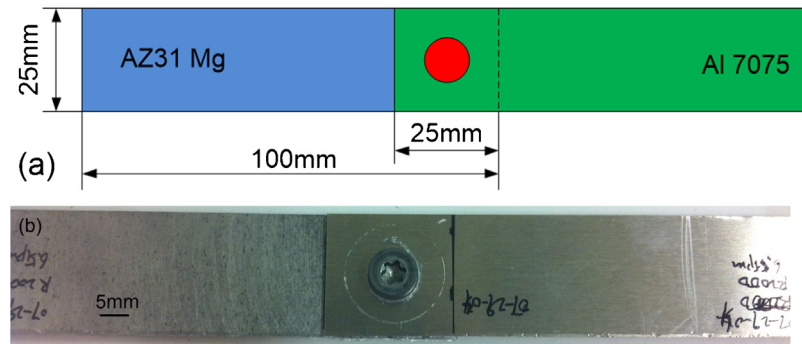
Tensile shear specimen geometry: (a) schematic illustration; (b) actual joint.
